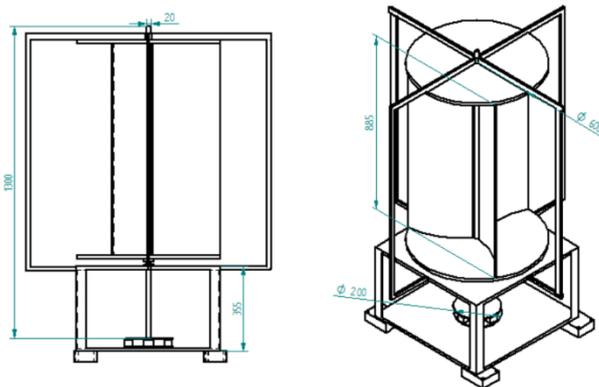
Assembled view of vertical axis wind turbine with dimensions (in mm)
